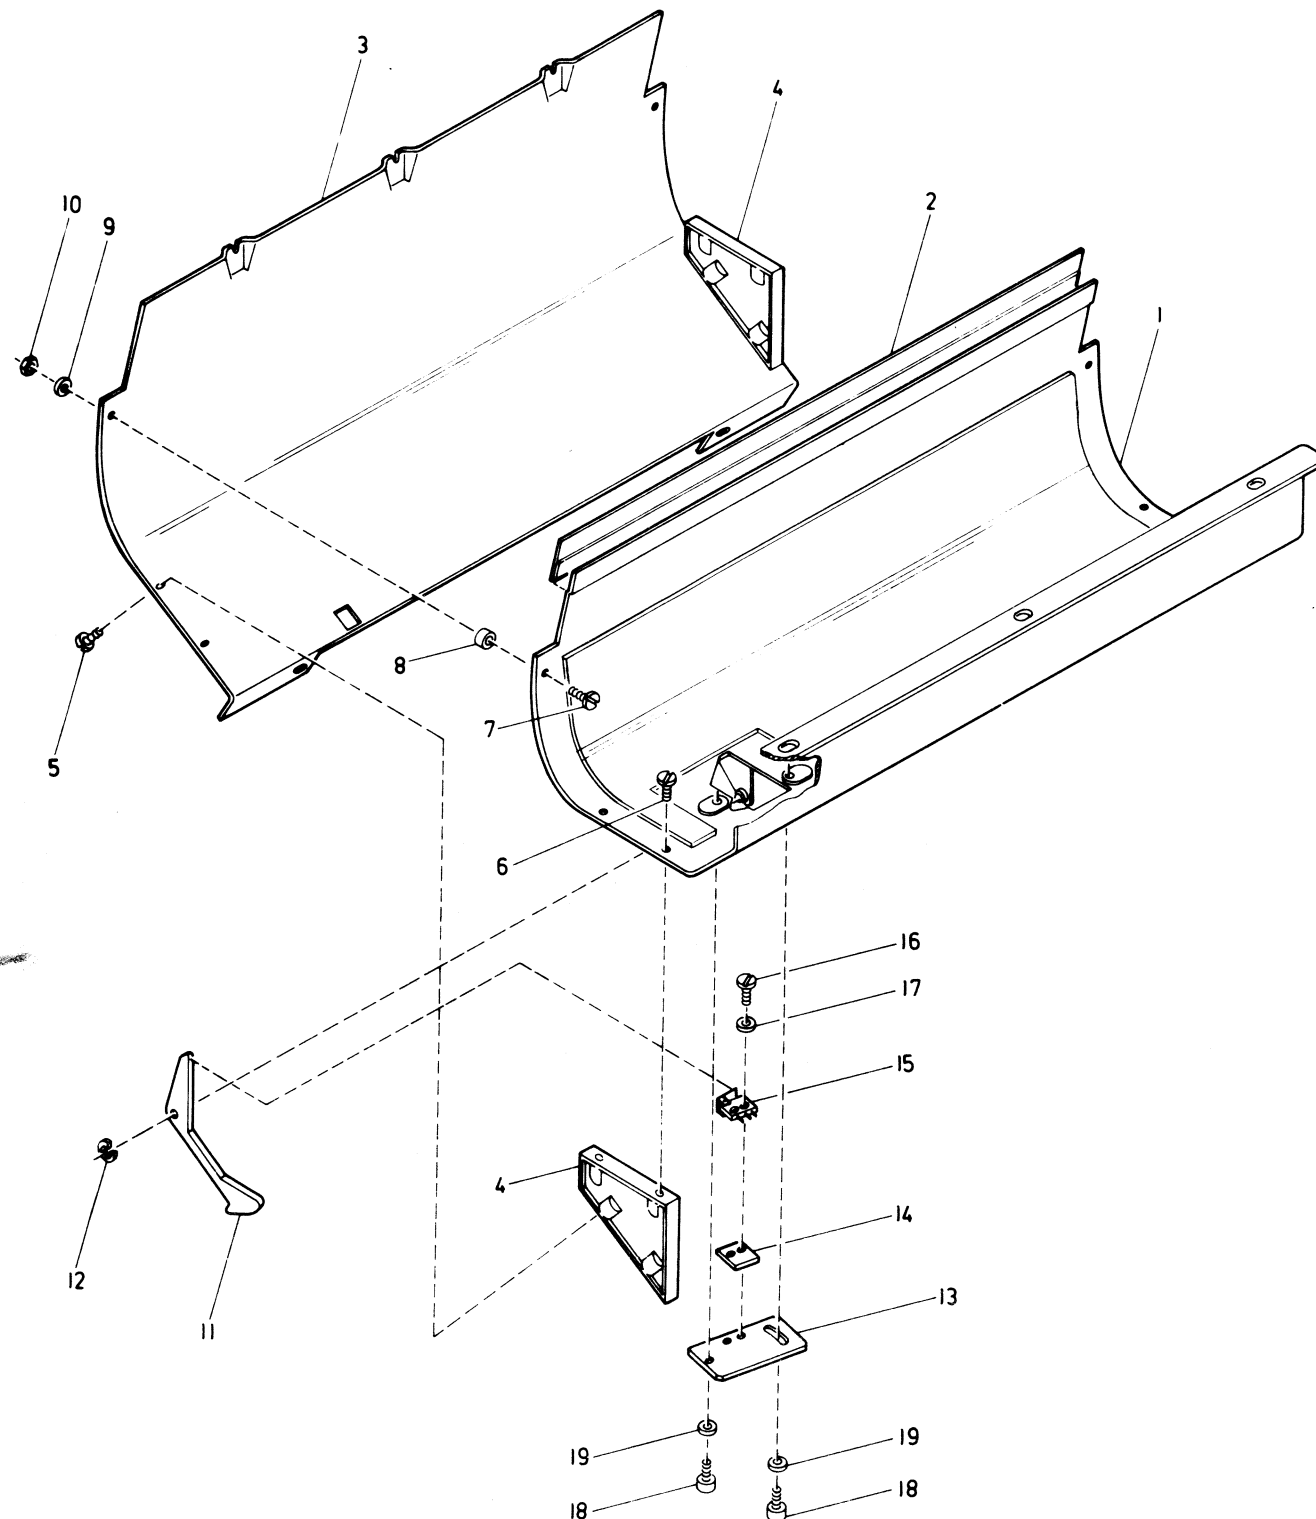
LOWER STRUCTURE ASSEMBLY. SEE LIST 12.
